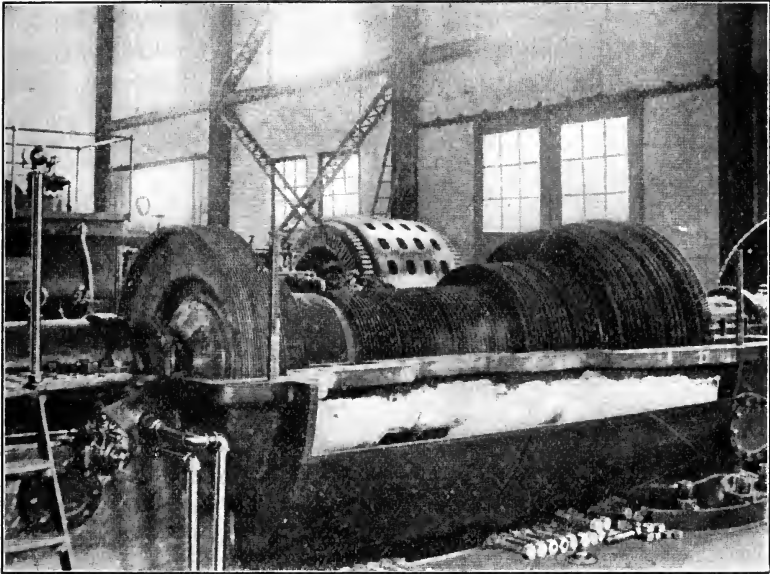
Westinghouse-Parsons turbine with the upper casing removed.
